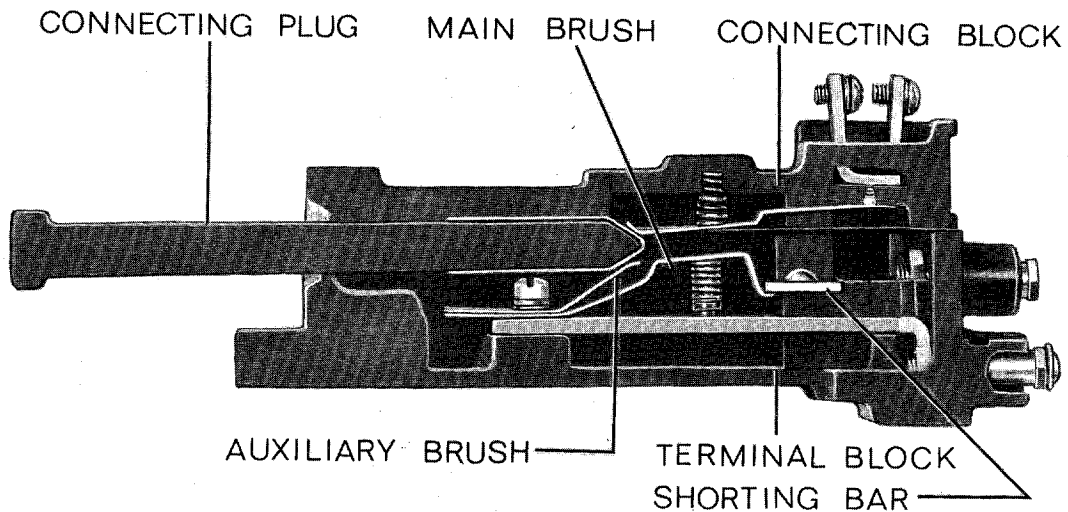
(8023399) Low Gradient Contact Assembly For The Directional Unit
